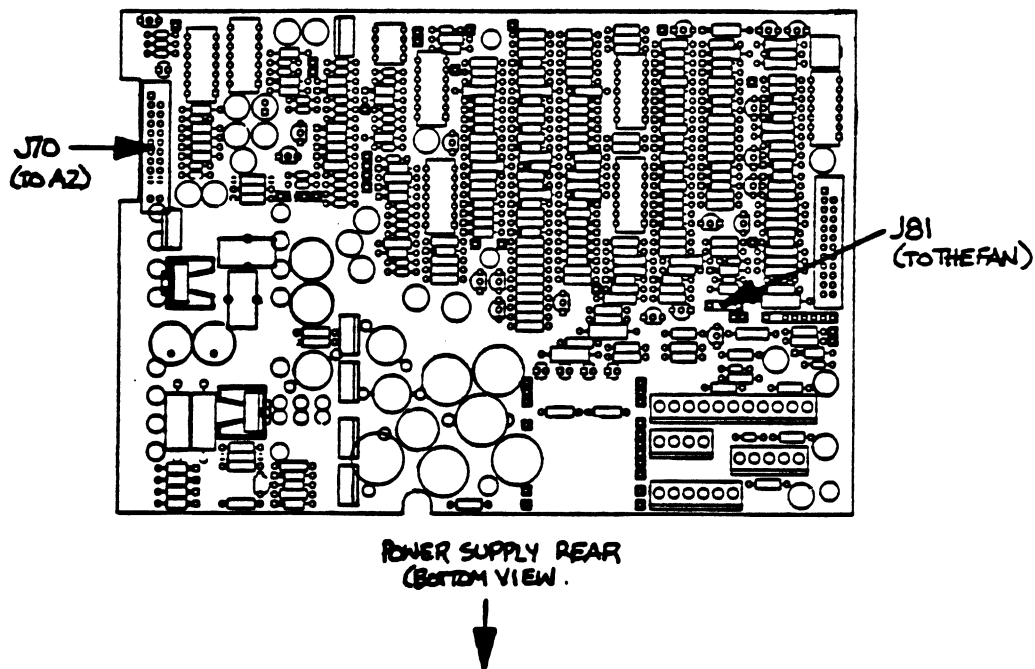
AC. Connector locations for removal of the A2A2 Control Rectifier Board.
